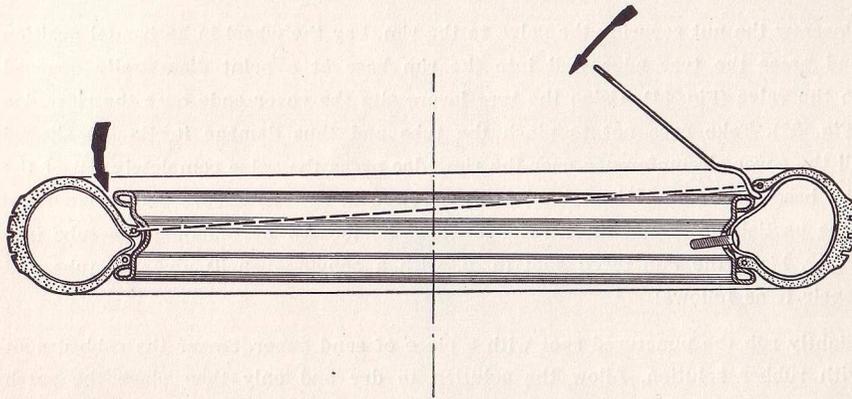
Rim and tyre — sectional view — fitting the tyre cover
